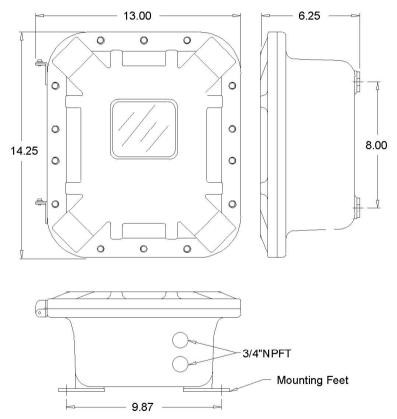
NEMA 7 Explosion-Proof Wall Mount Enclosure
